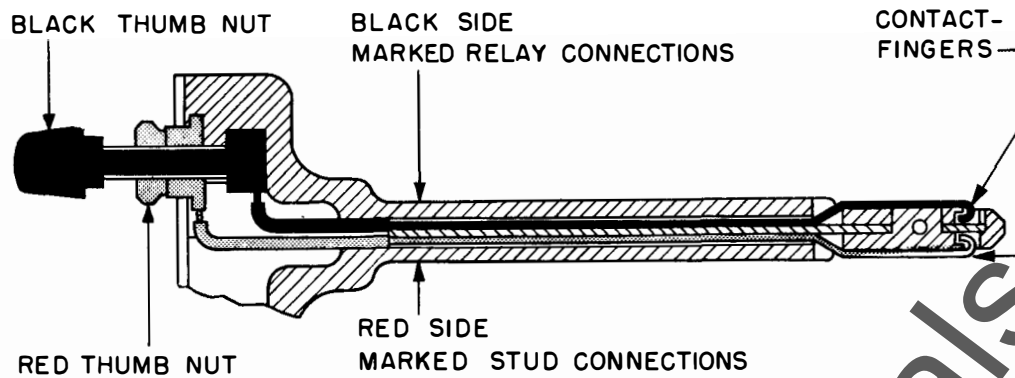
Sectional View of XLA12A Test Plug Showing Internal Wiring
